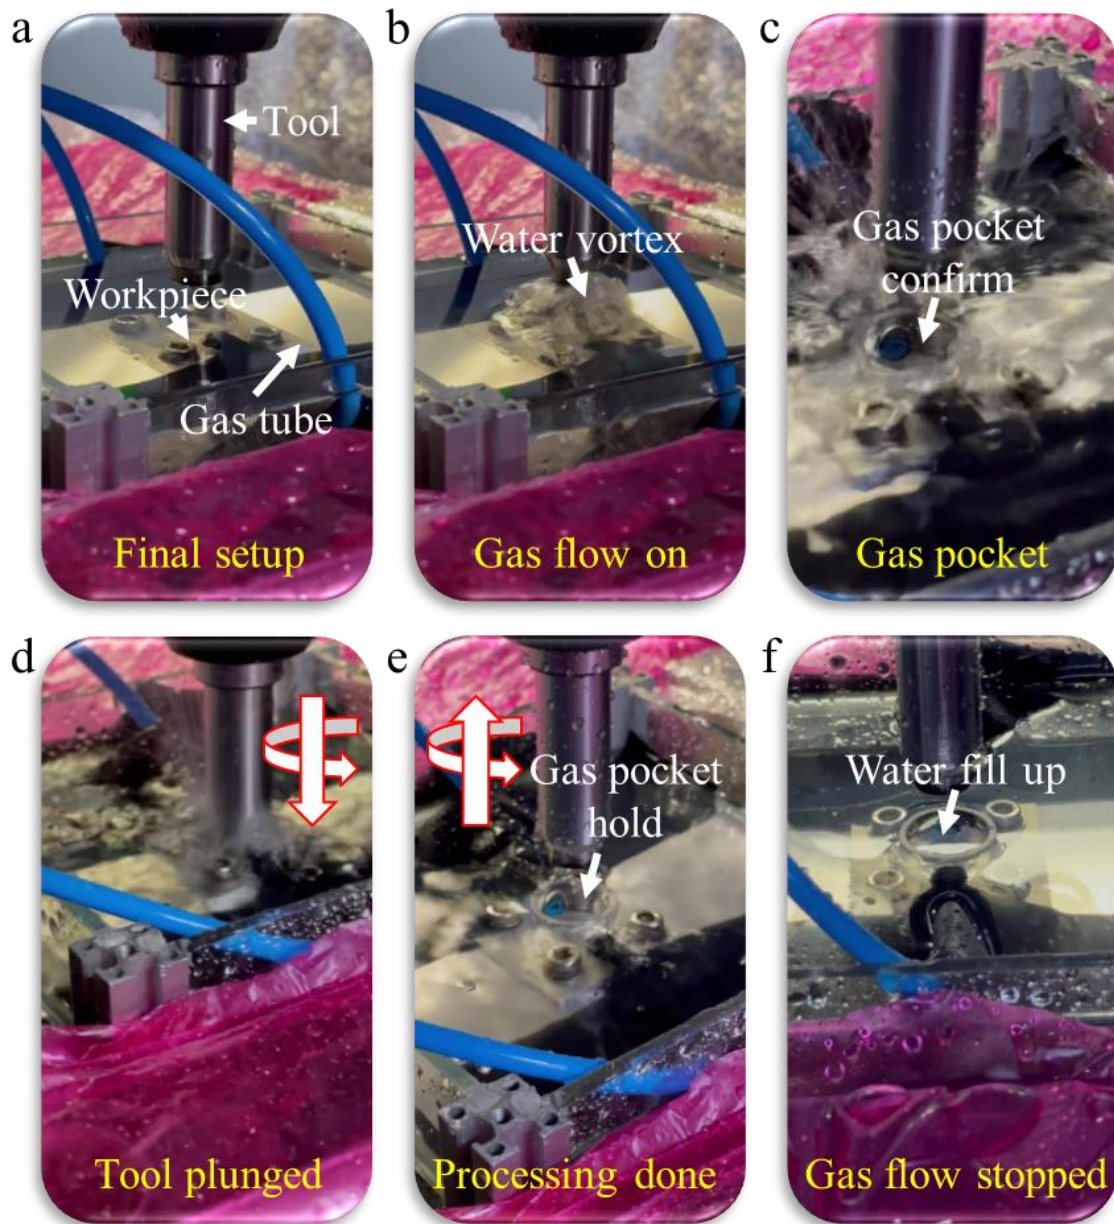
(a) The complete setup with the tank for GAFSSW, (b) water vortex began initiating gas flow, (c) gas pocket formed and enclosed with the adapter, (d) rotating tool plunged next to the workpiece, (e) tool extracted after welding. The gas pocket was held until the workpiece cooled down, (f) gas flow stopped, and water filled up inside the adapter.
